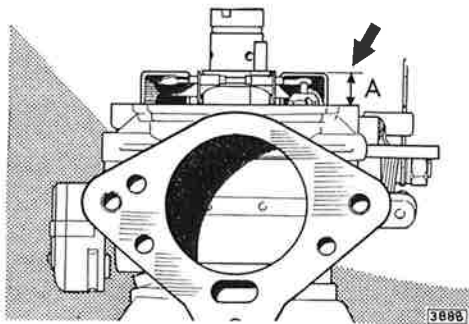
Checking the float height. Dimension A should be $16.5 \pm .5$ mm.
